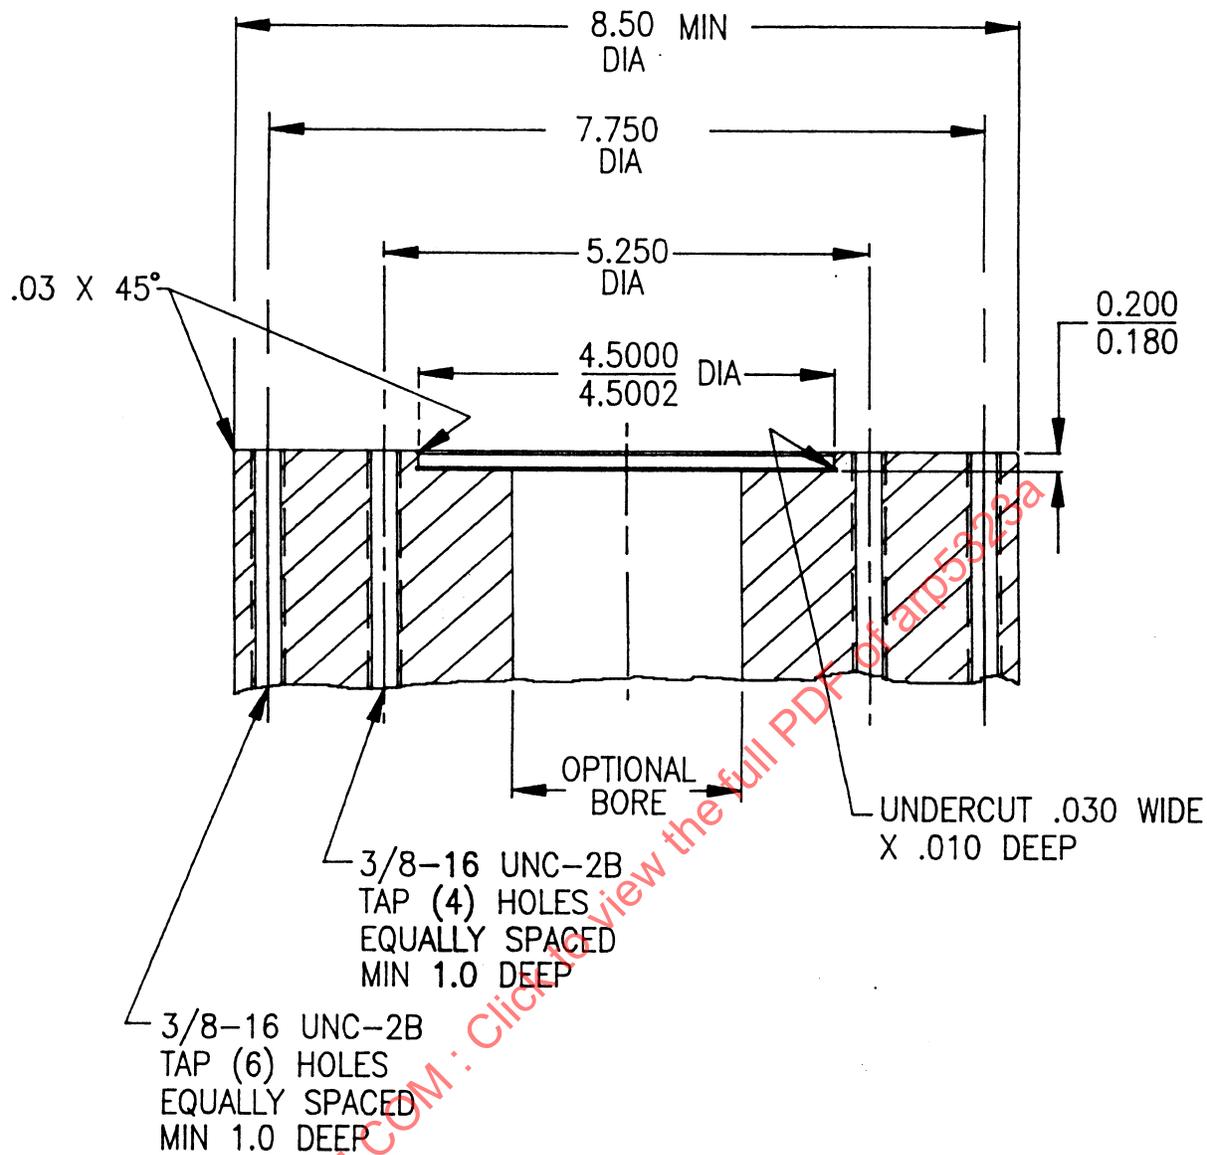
Spindle flange, machine class 50, 100, 250, 500
